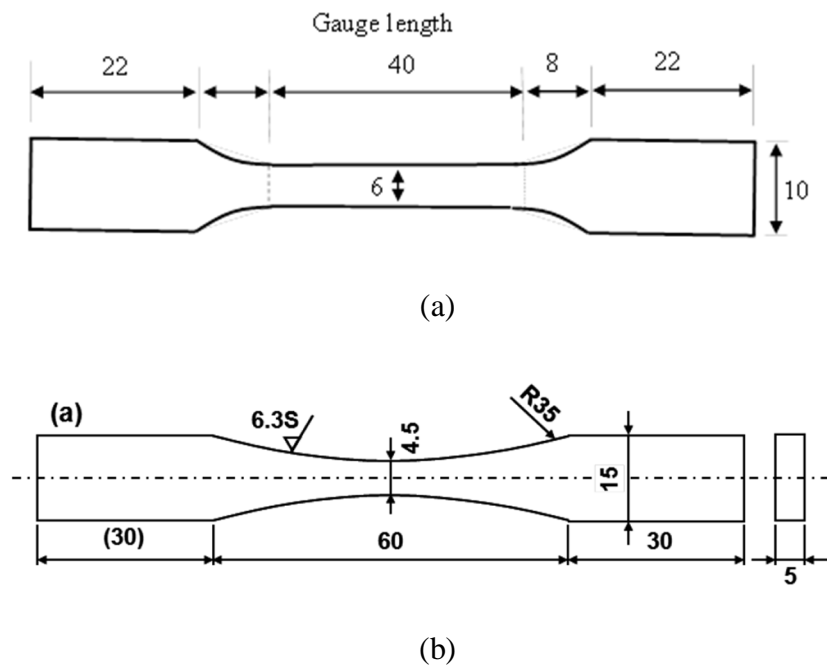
Homogeneous mechanical (tensile and fatigue) testing specimens with (a) uniform cross-section (b) non-uniform cross-section [28, 29].
